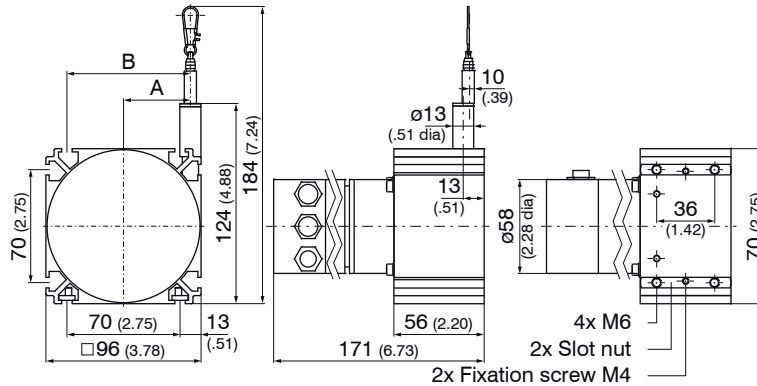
Dimensional drawing WDS- ... - P96 - CO/PB, dimensions in mm (inches), not to scale
